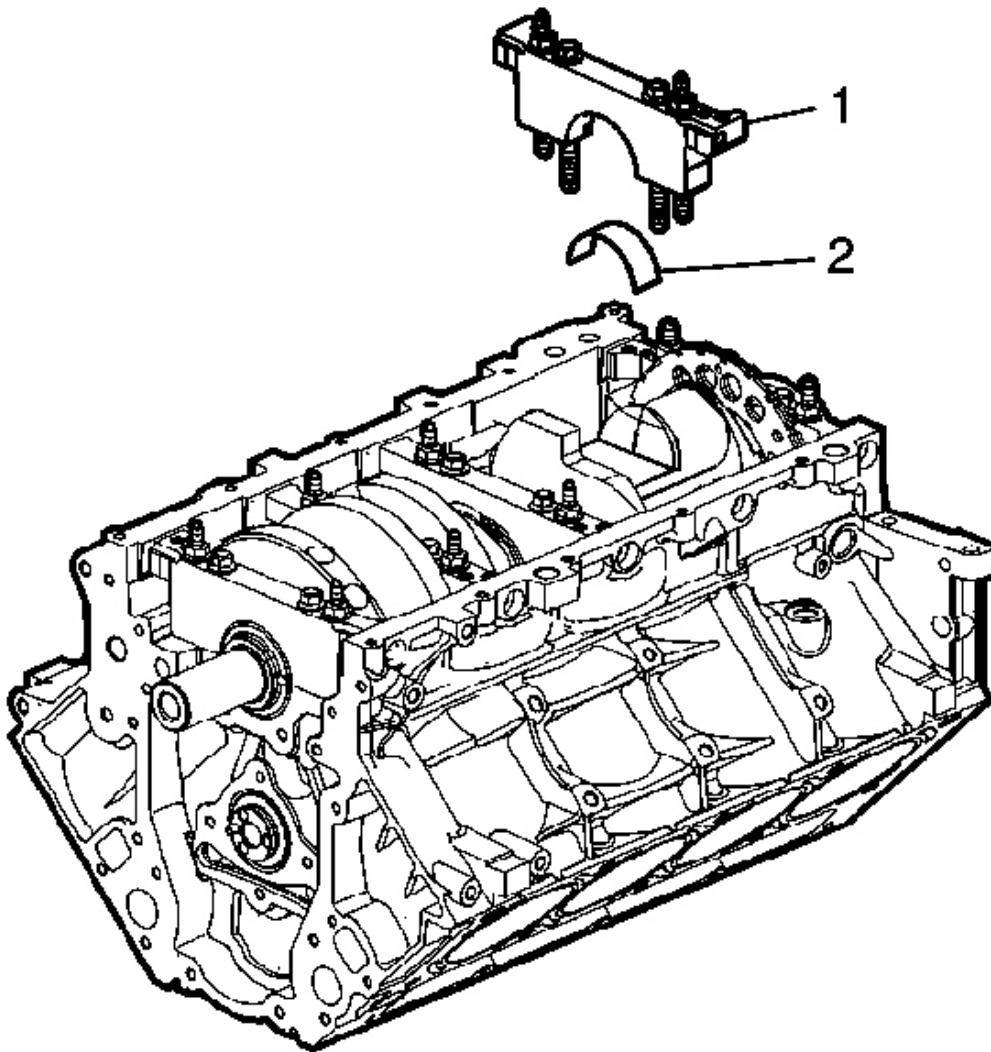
View Of Bearing Cap, Bolt & Bearing Half
